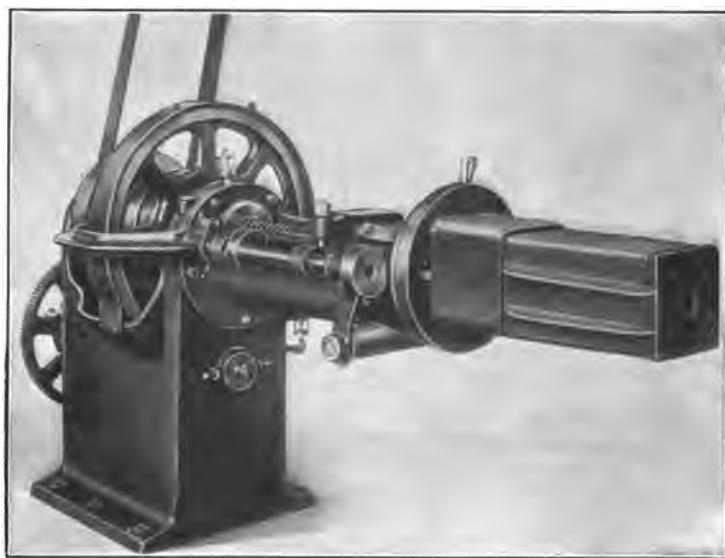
Broaching Machine engaged in an Exceptionally Heavy Operation
